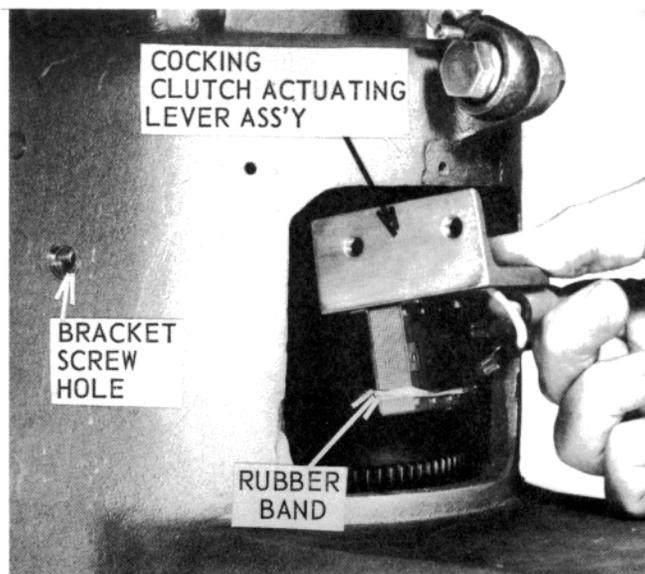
Reinstalling Cocking Clutch Actuating Lever Assembly
